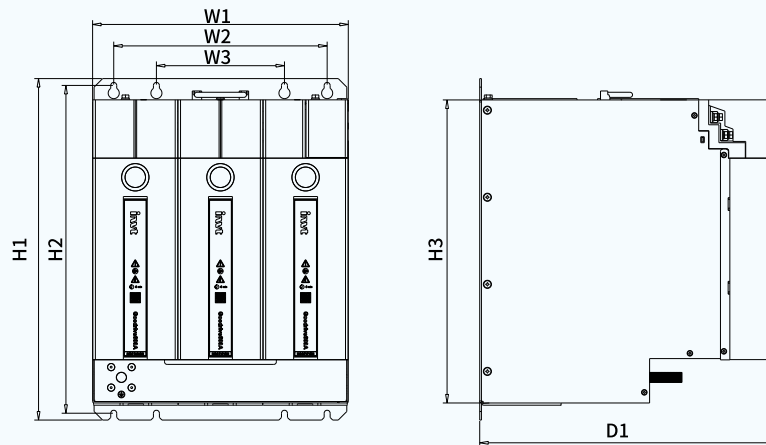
Wall mounting drawing for the 380V 160kW rectifier unit
